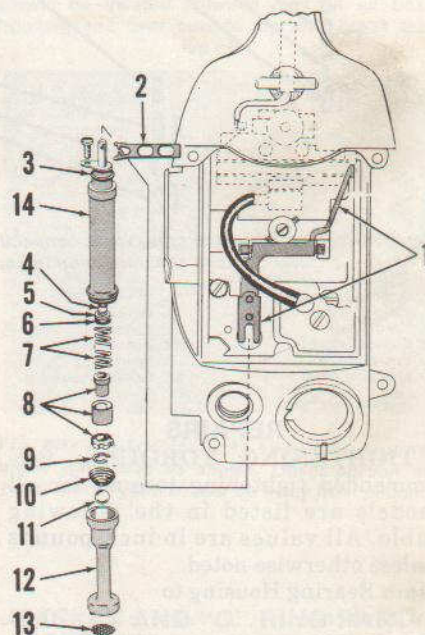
Exploded view of the manual chain oiler pump. Early models use spring (10) and later models have special webbing in the housing to center check ball (11).
